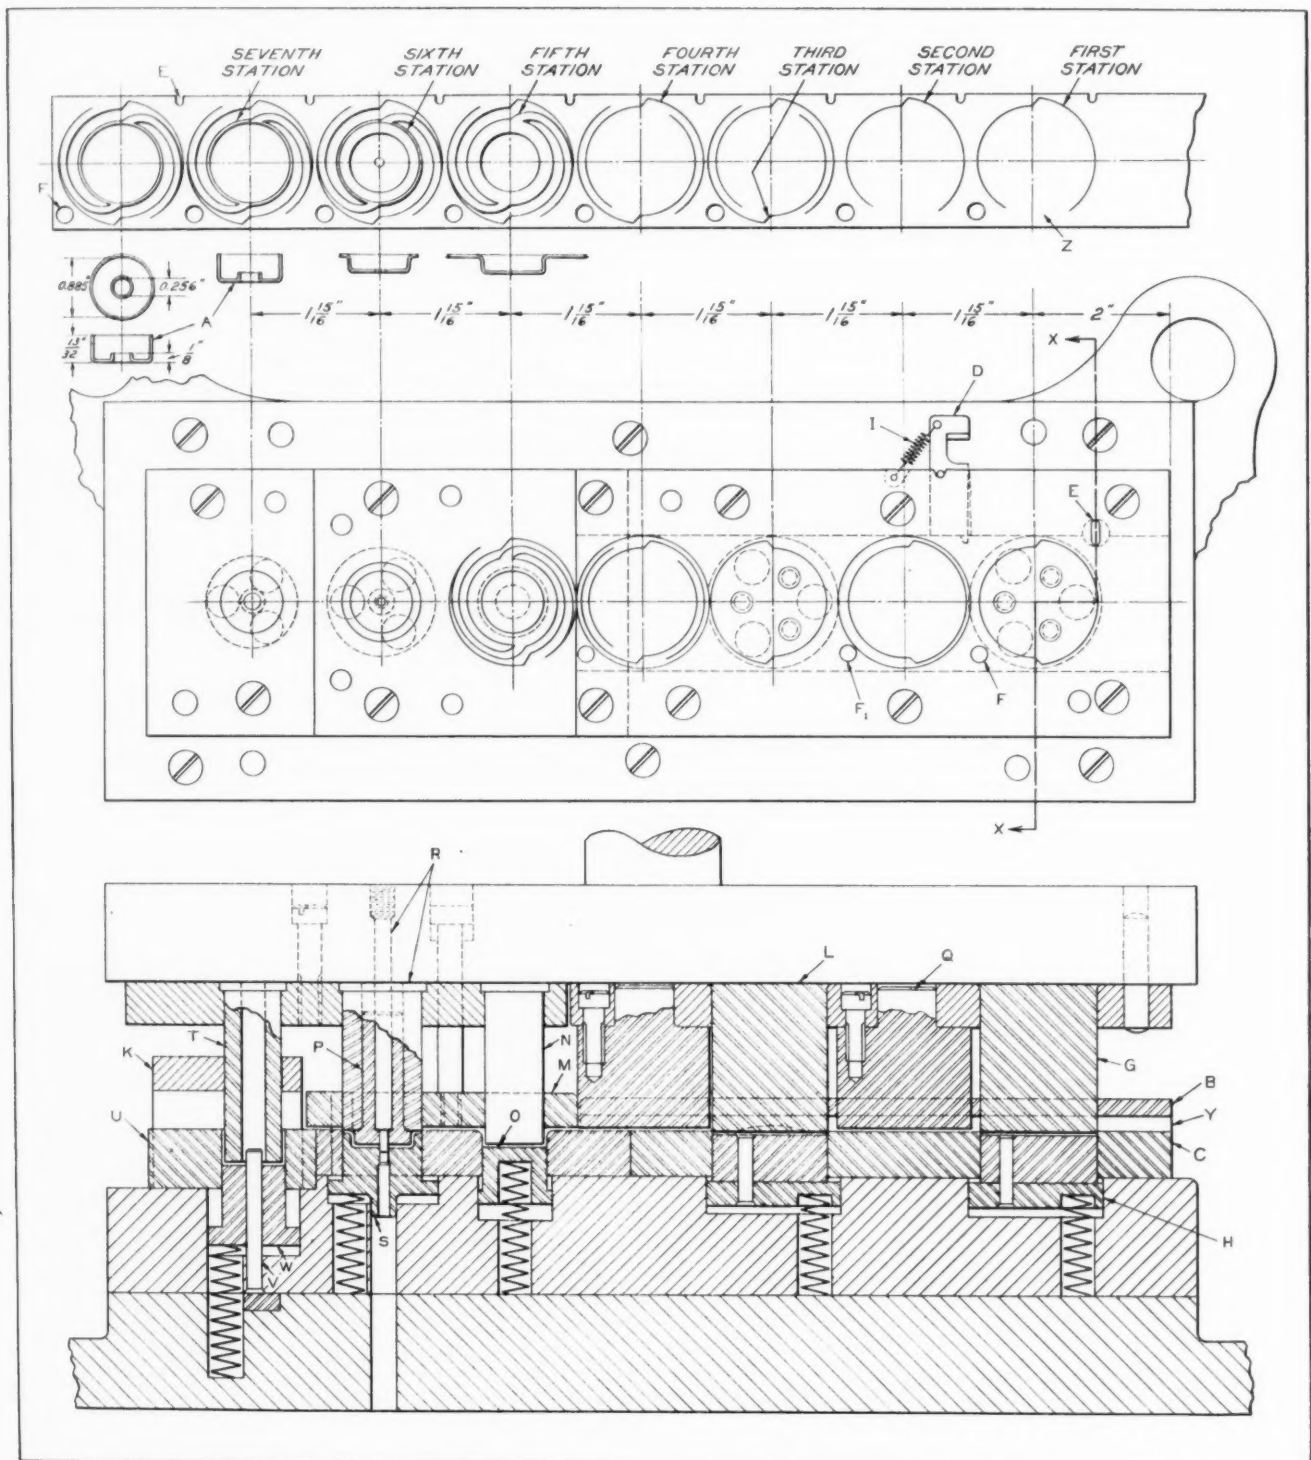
(Upper View) Strip Stock, Showing Progressive Operations Performed on Die Shown in the Two Lower Views; (Two Lower Views) Plan View of Die and Cross-section of Punch and Die for Producing Shell A
